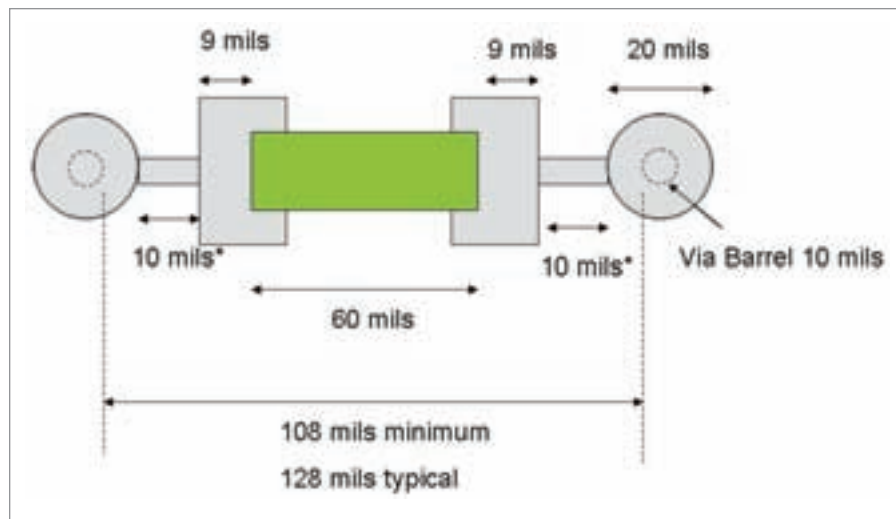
Typical minimum 0603 capacitor mounting dimensions
